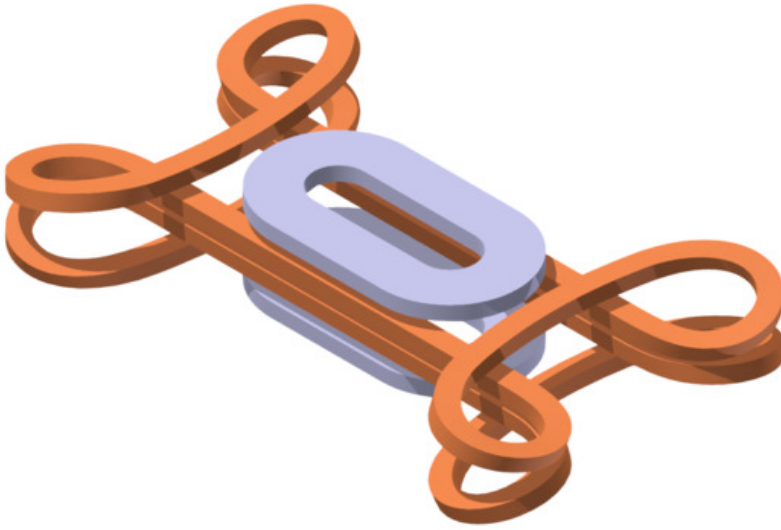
Coil layout of the short version cloverleaf-racetrack magnet presented in Chapter 6.
